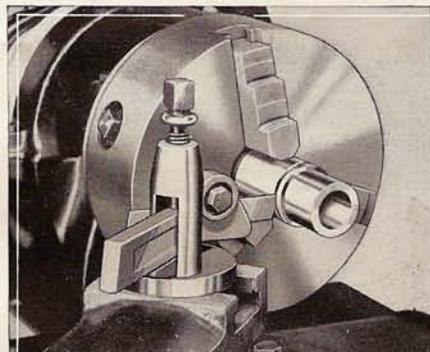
Cutting-off a Bushing, made complete, in one set-up, in Chuck.
